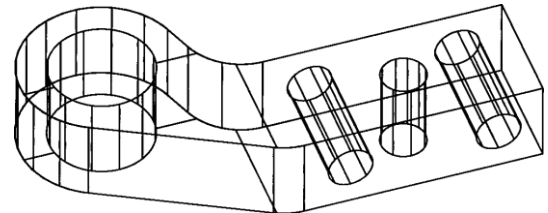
EXPLODED VIEW OF THE FEATURES MAKING UP THE REVERSE ENGINEERED SHOCK PLATE.
